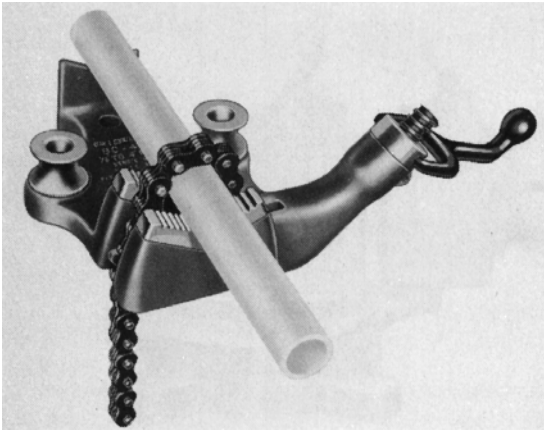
Pipe vise. (Courtesy Ridge Tool Company.)
